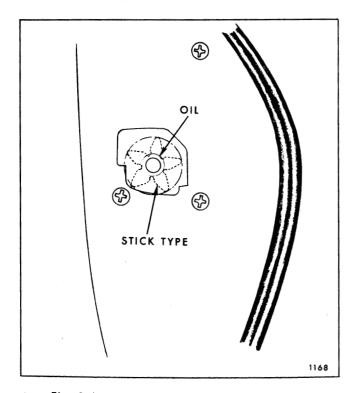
Door Lock Fork Bolt And Rotary Bolt
